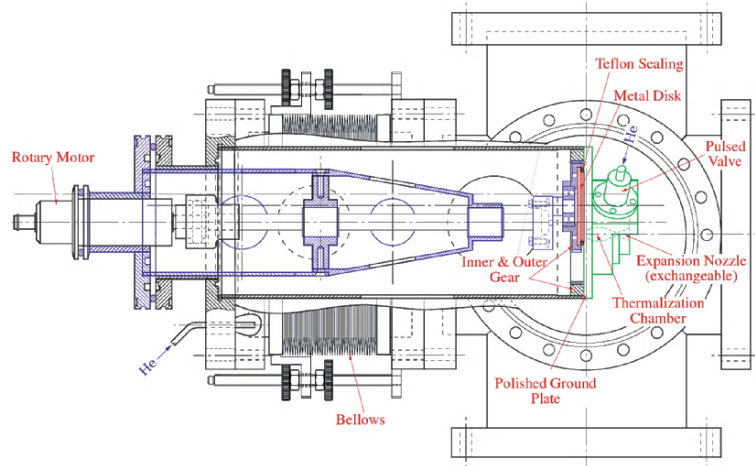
Details of the high-frequency laser evaporation source. Shown are the rotary motor, which drives the planetary gear assembly for turning the target, and the thermalization chamber with exchangeable expansion nozzle. The laser-produced plasma expands into this thermalization chamber. A helium gas pulse is then introduced by a piezo-driven pulsed valve and synchronized with the laser pulse into the same volume. The metal–gas mixture then expands through the nozzle into the vacuum leading to cluster formation. In contrast to conventional sources, the laser beam is coaxial to the molecular beam axis. The bellow is used to align the source along the optical axis of the ion optics
